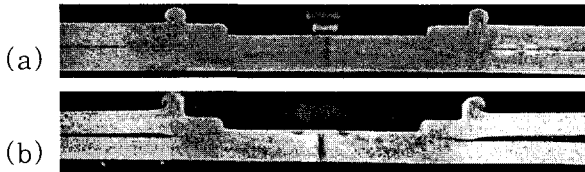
Micrographs of the cross-section of friction stir spot welds made by the tool on (a) 700rpm-15mm/min (b) 1600rpm-15mm/min
